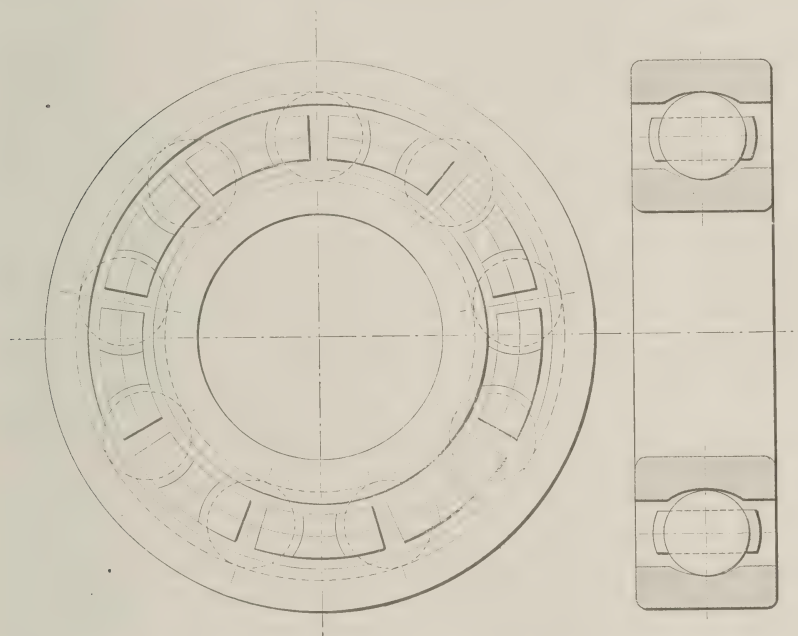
ELEVATION AND CROSS SECTION OF THE HESS-BRIGHT BALL BEARING
